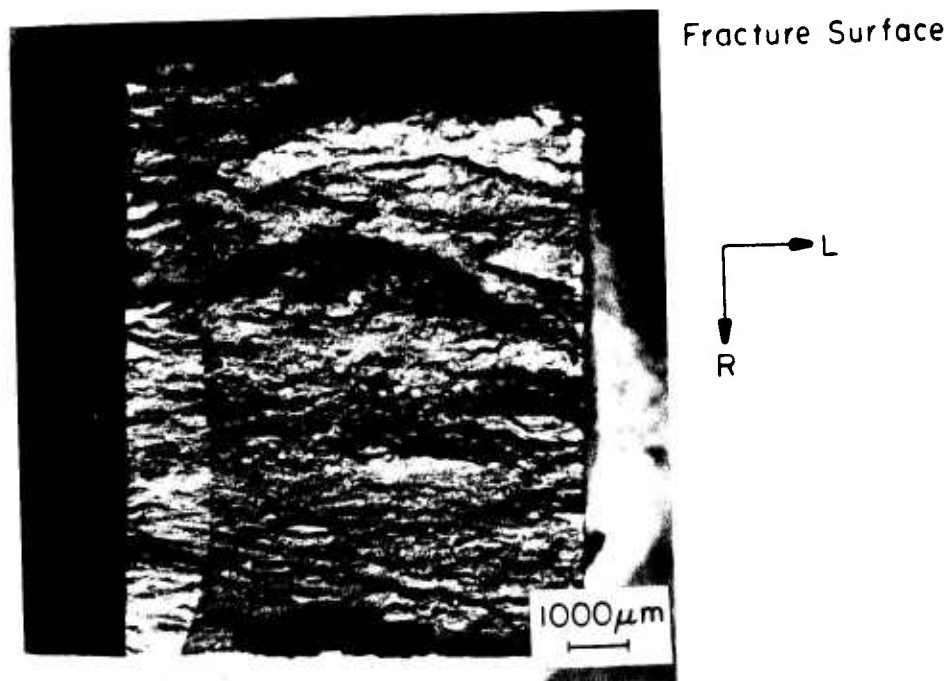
Alloy 227, sample 7SLC1. Fracture surface X8.
